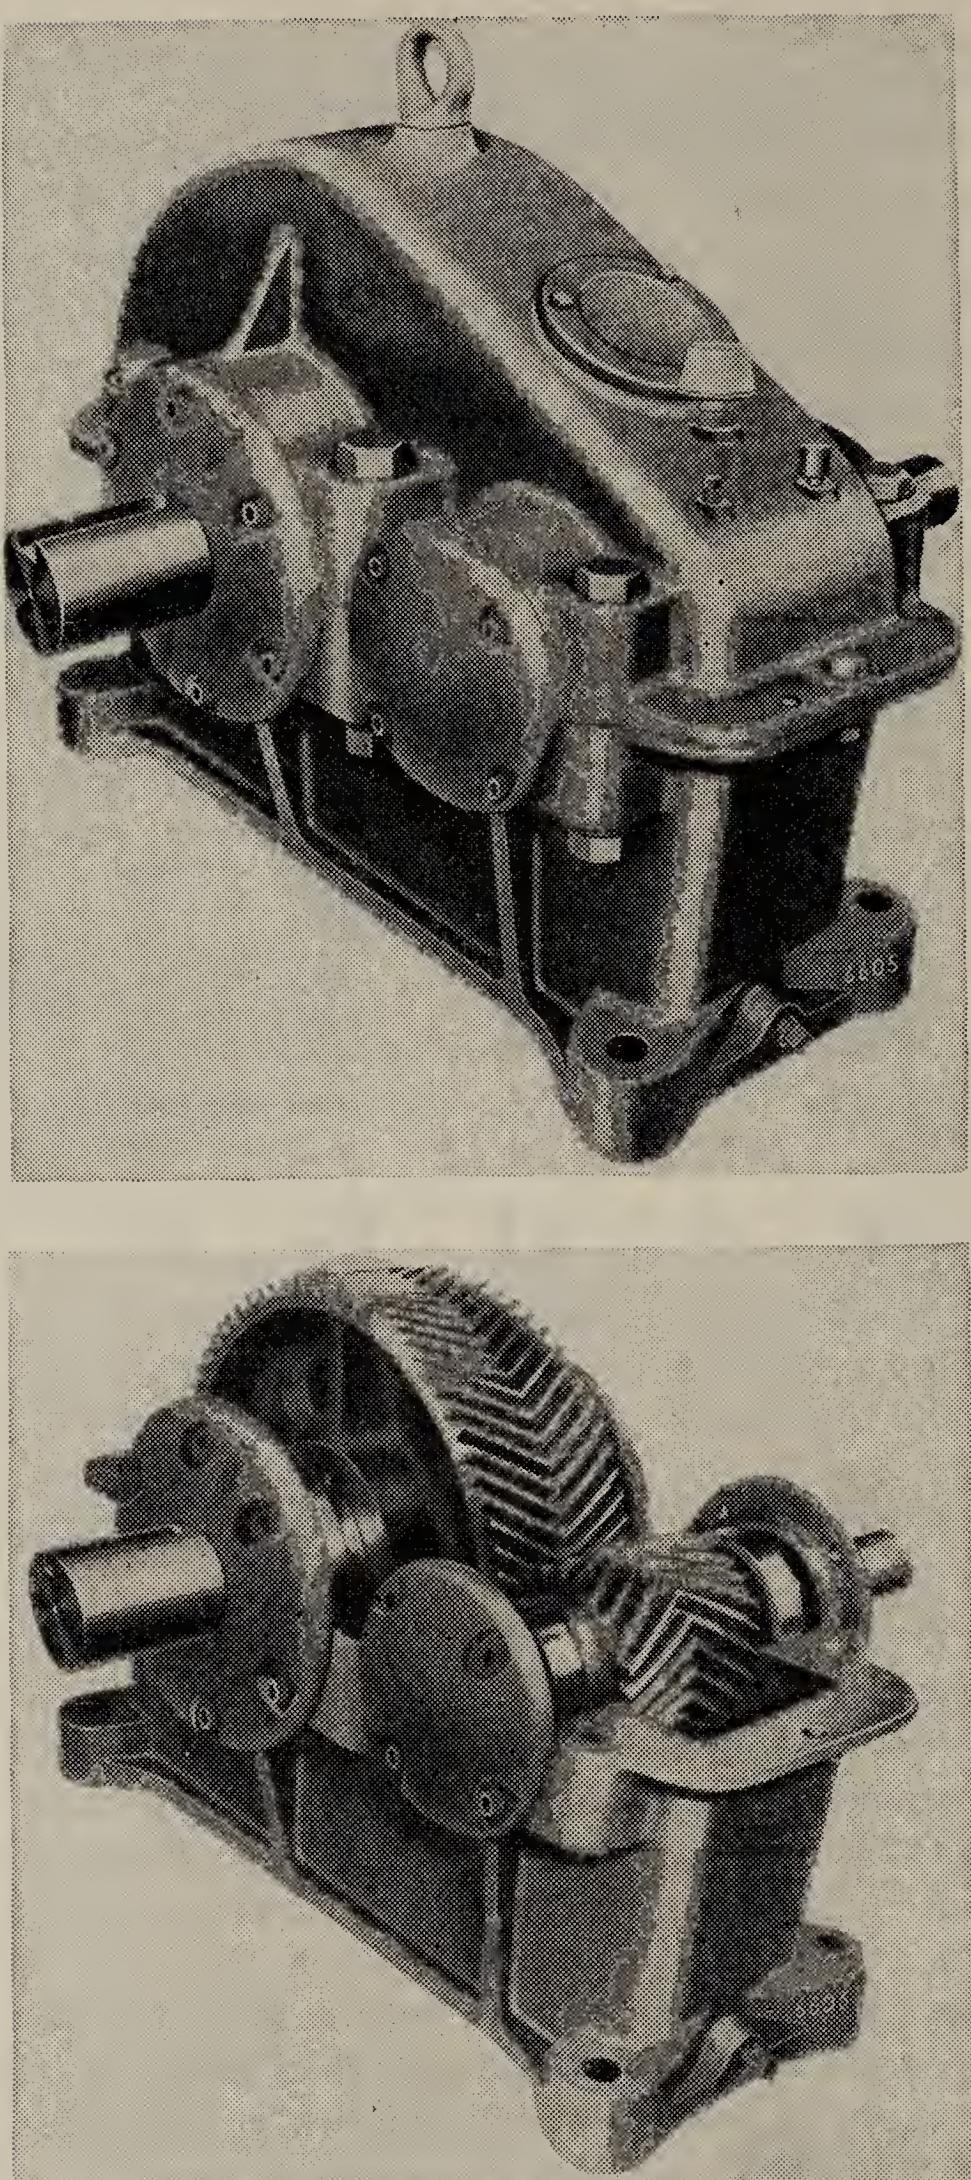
Single-reduction herringbone-gear speed reducer, lower view with top half of housing removed. (Courtesy of DeLaval Steam Turbine Company.)
